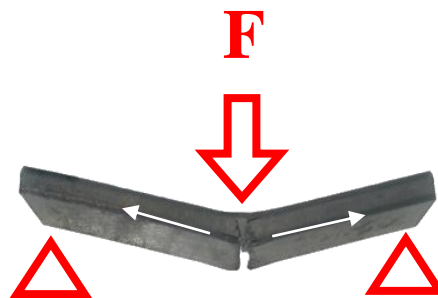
The appearance of Ta-W-Ta multilayered specimen after three-point bending tests
